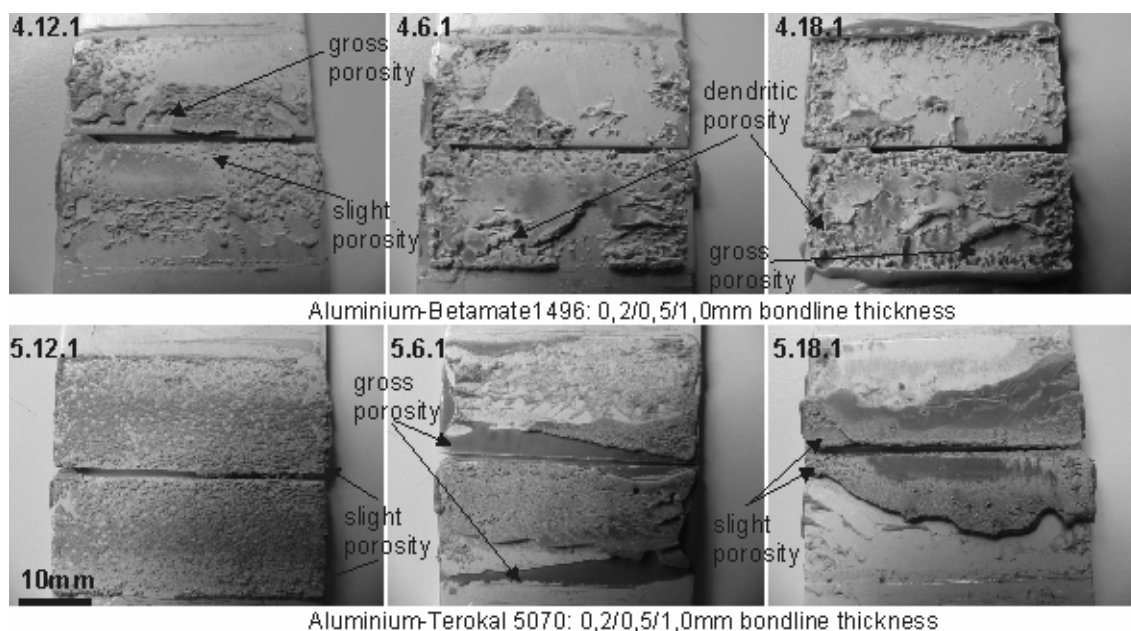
Macroscopic observations of moisture uptake on the fracture surface of the aluminium lap joints bonded with the adhesives “Betamate 1496” and “Terokal 5070” and exposed to 90% r.h. pre-bond humidity.
